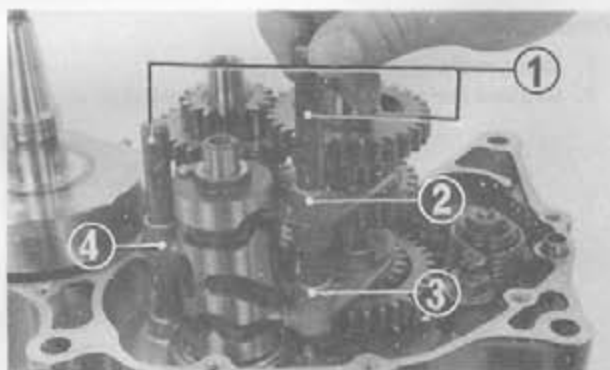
(1) Gearshift fork shaft (2) Left gearshift fork
